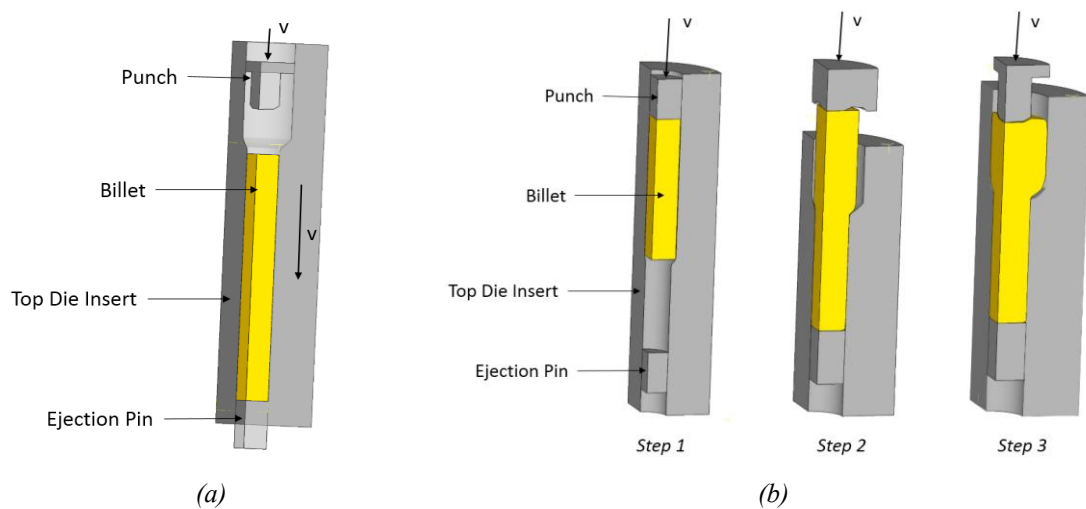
FE model in DEFORM: (a) injection forging, (b) multistep forging.
